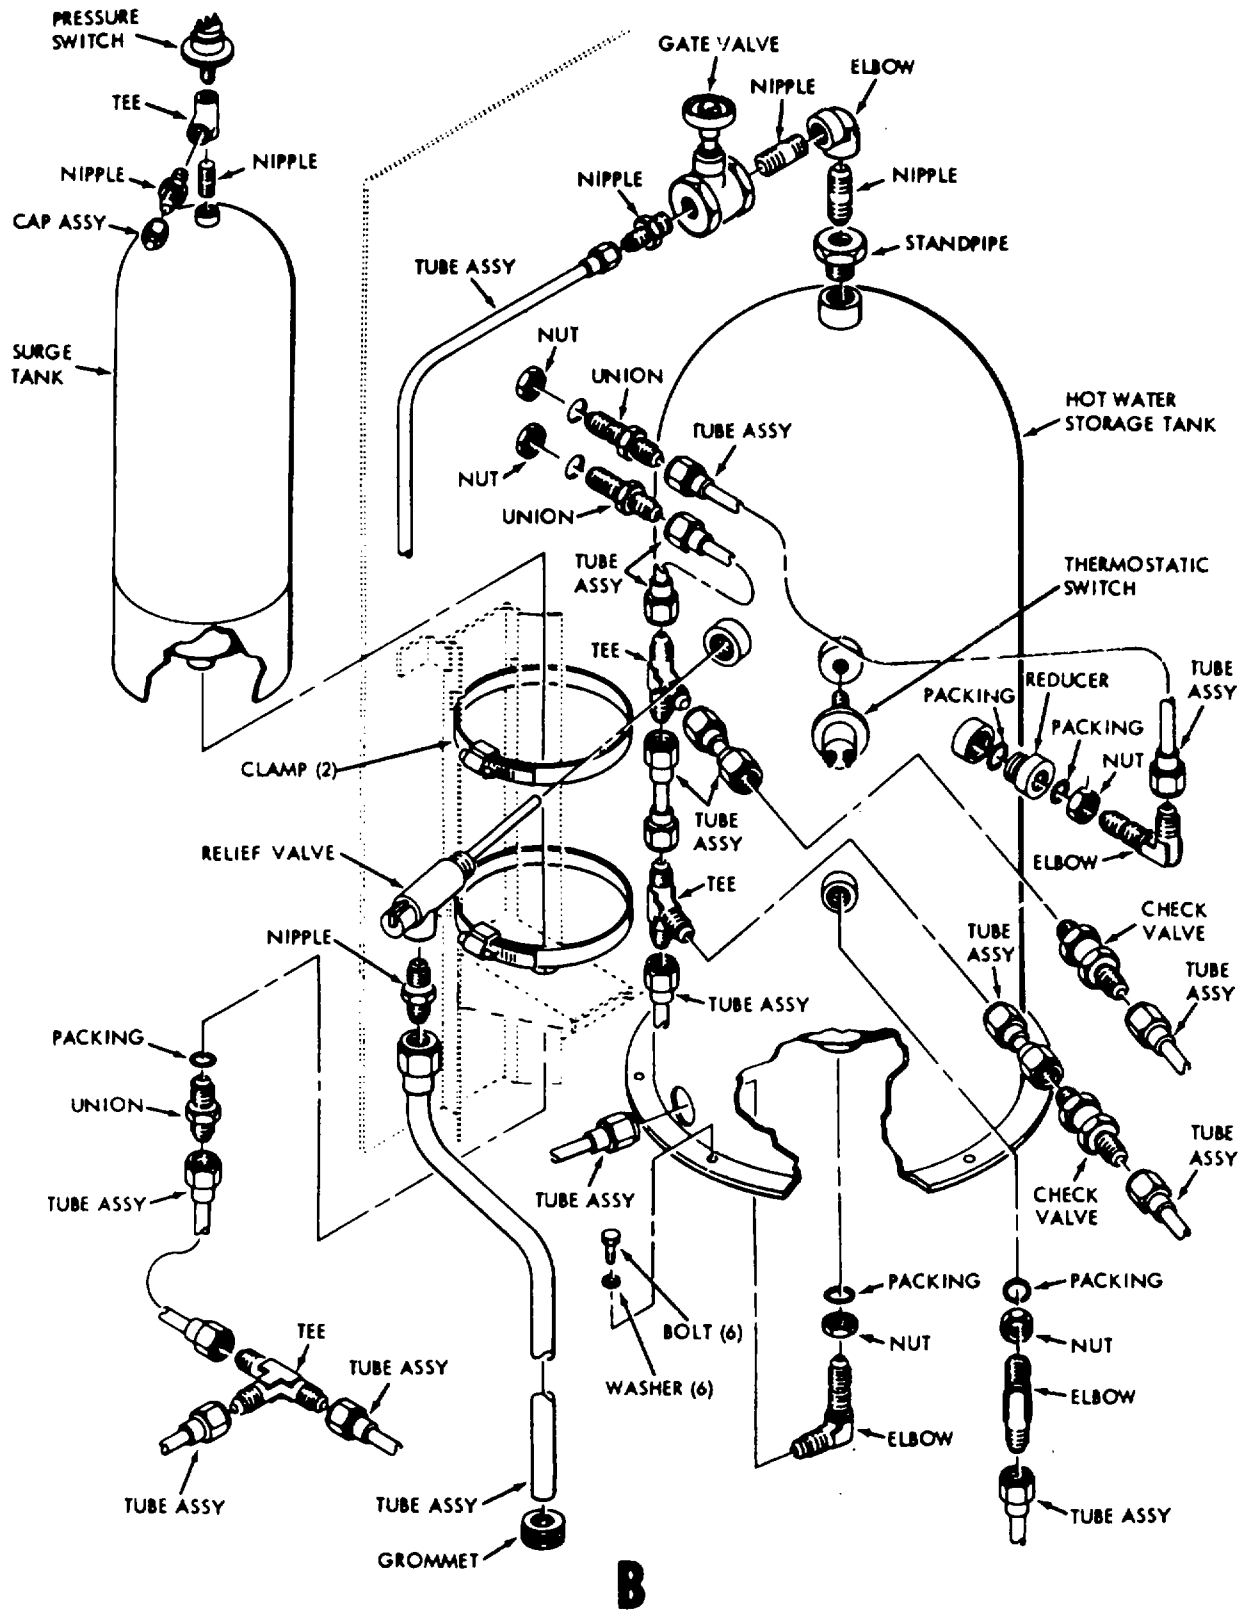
Upper rack assembly component replacement. (Sheet 3 of 3).
